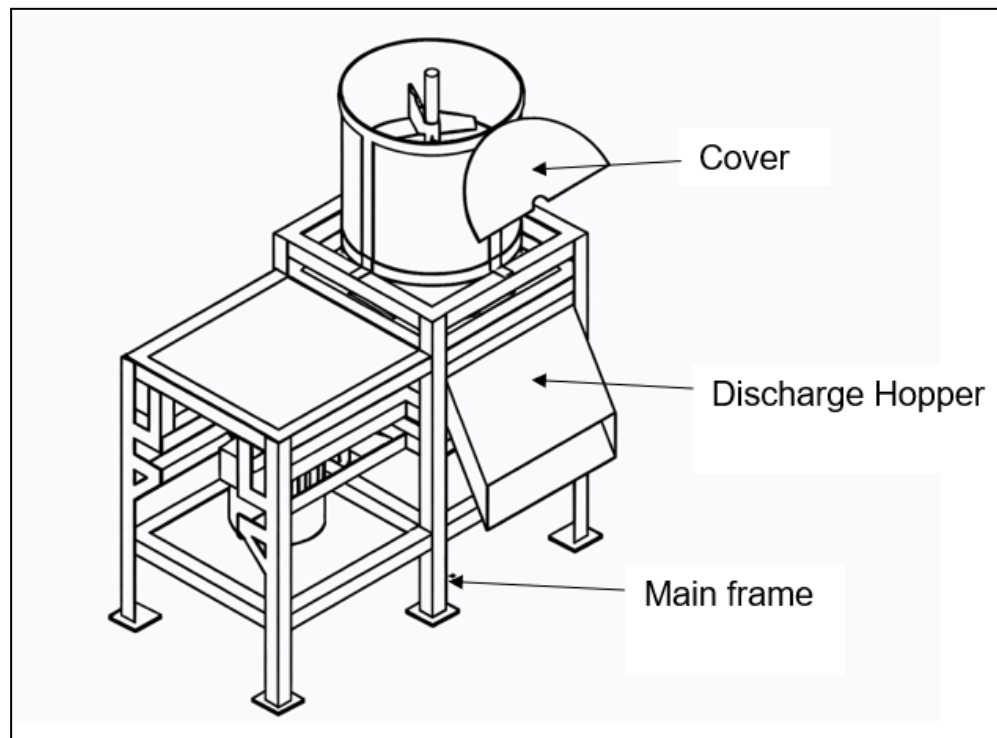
Typical design of a chipping machine (AMTEC-UPLB, 2005)
